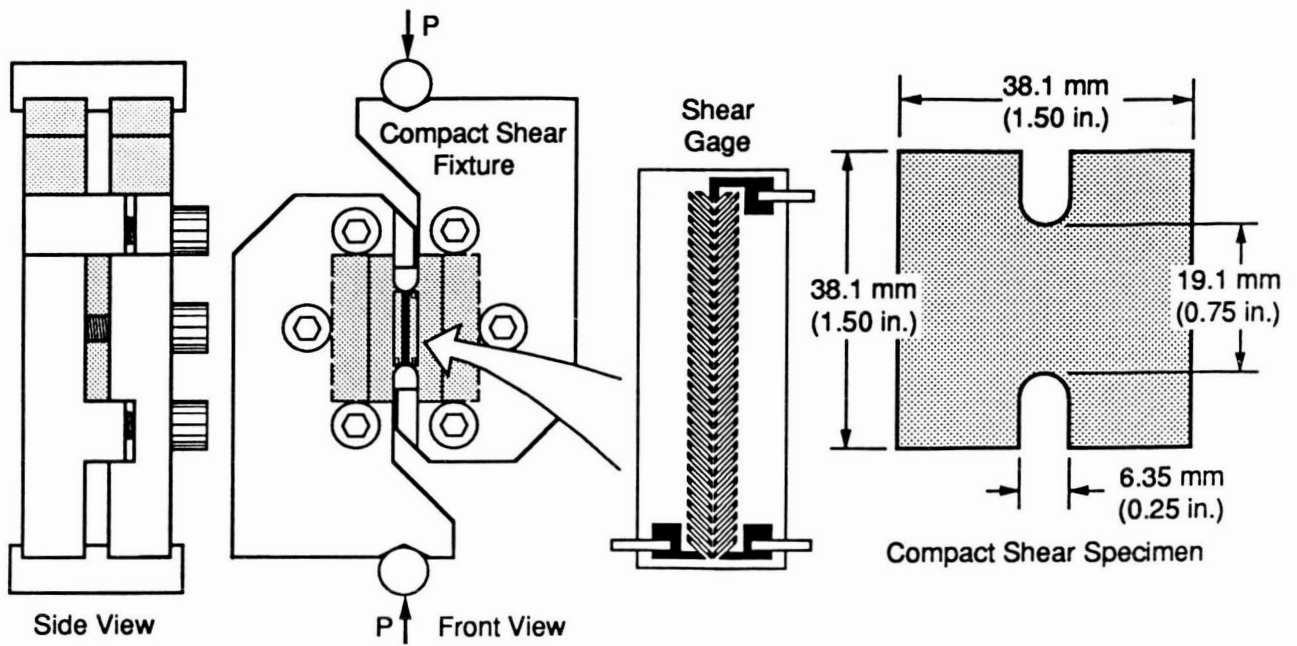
The compact shear specimen, loading fixture and shear gage.
